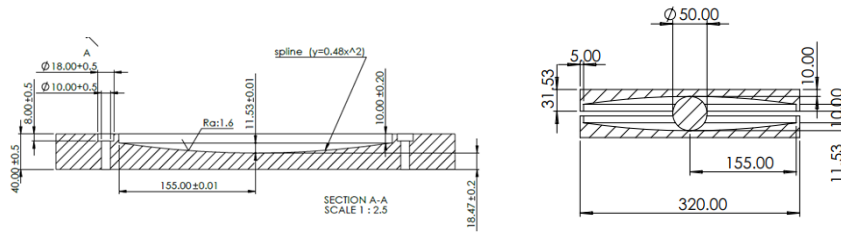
Two-dimensional CAD drawings of the first prototype of the RPI
